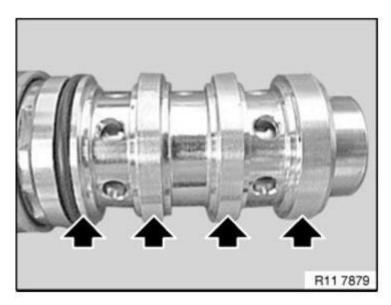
Locating Solenoid Valve Housing Surface Courtesy of BMW OF NORTH AMERICA, INC.
